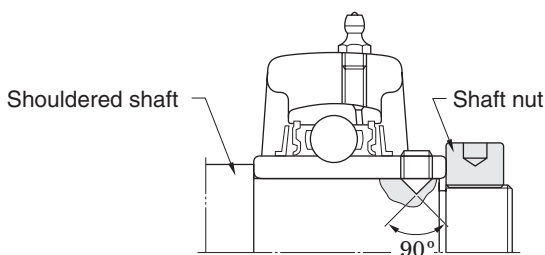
Example of installation with a shouldered shaft and shaft nut
